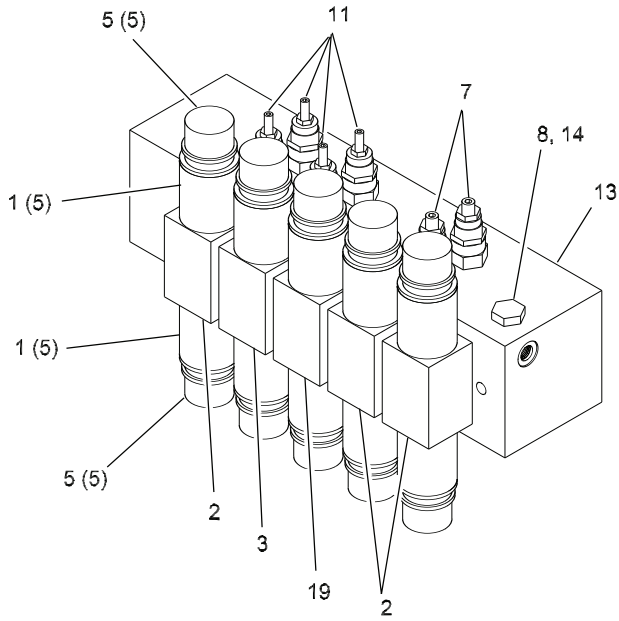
VALVE, HYDRAULIC MANIFOLD
